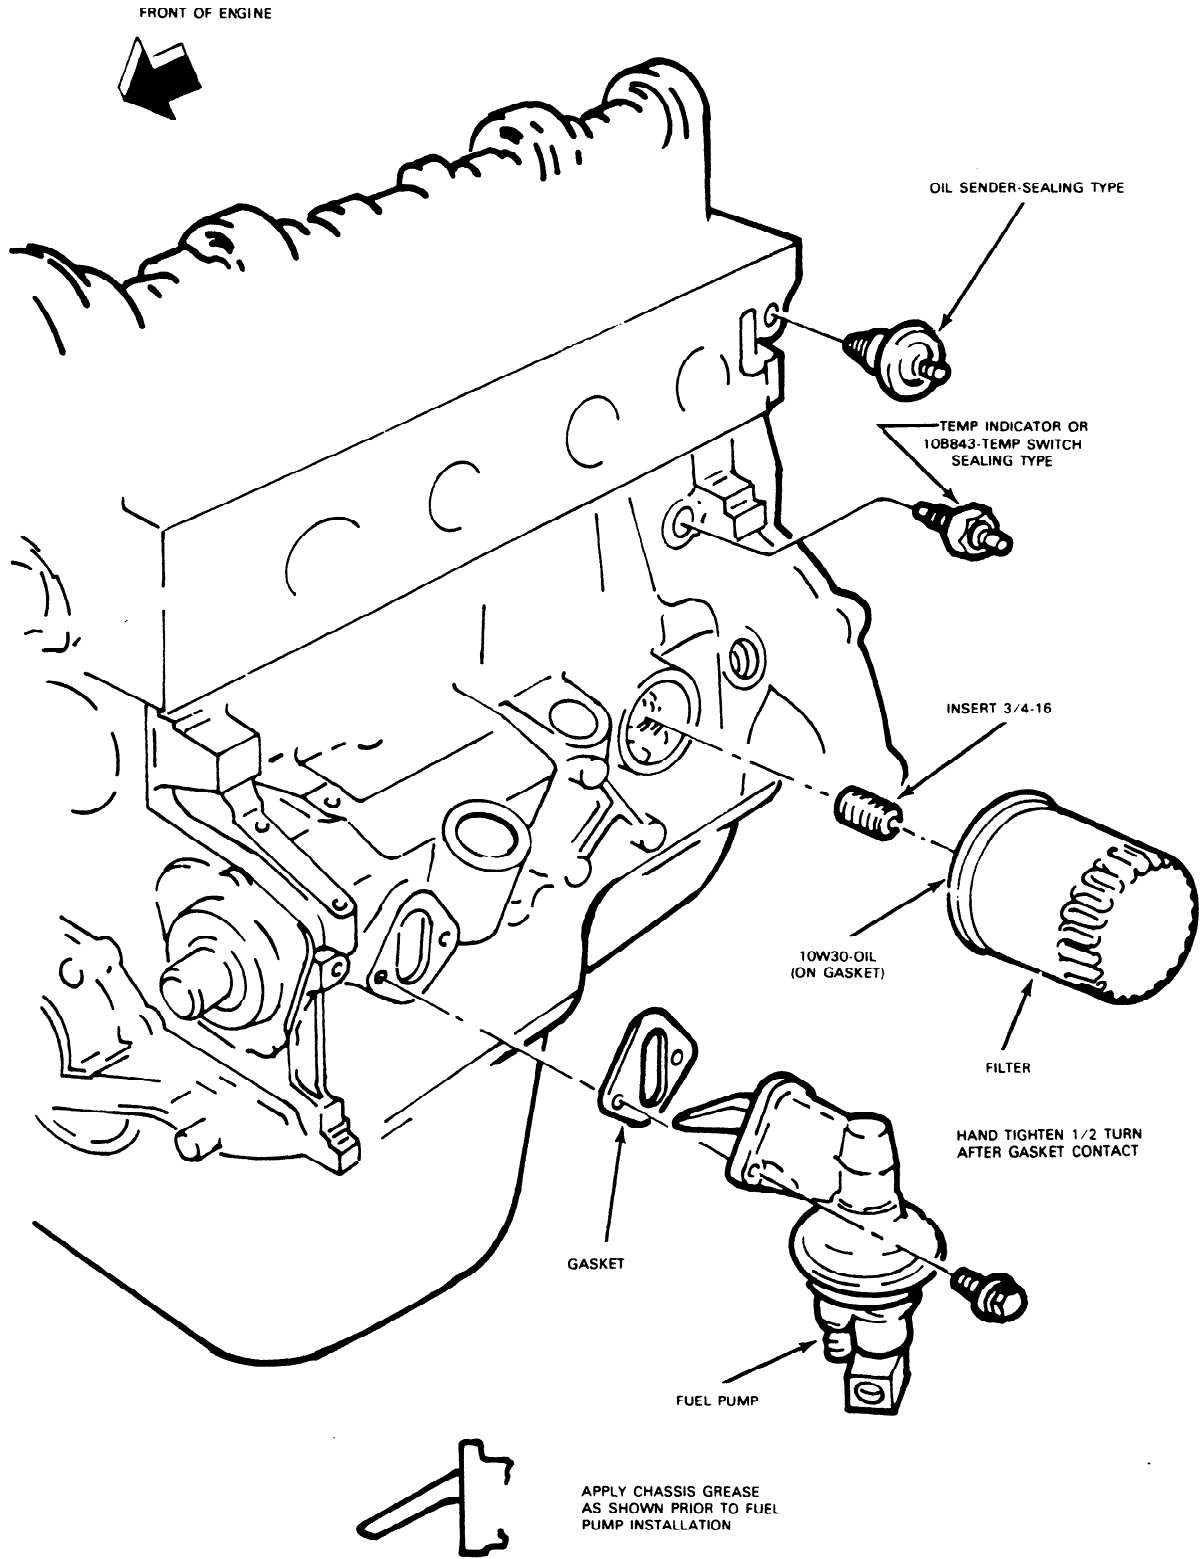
Oil Filter, Fuel Pump and Sending Units
